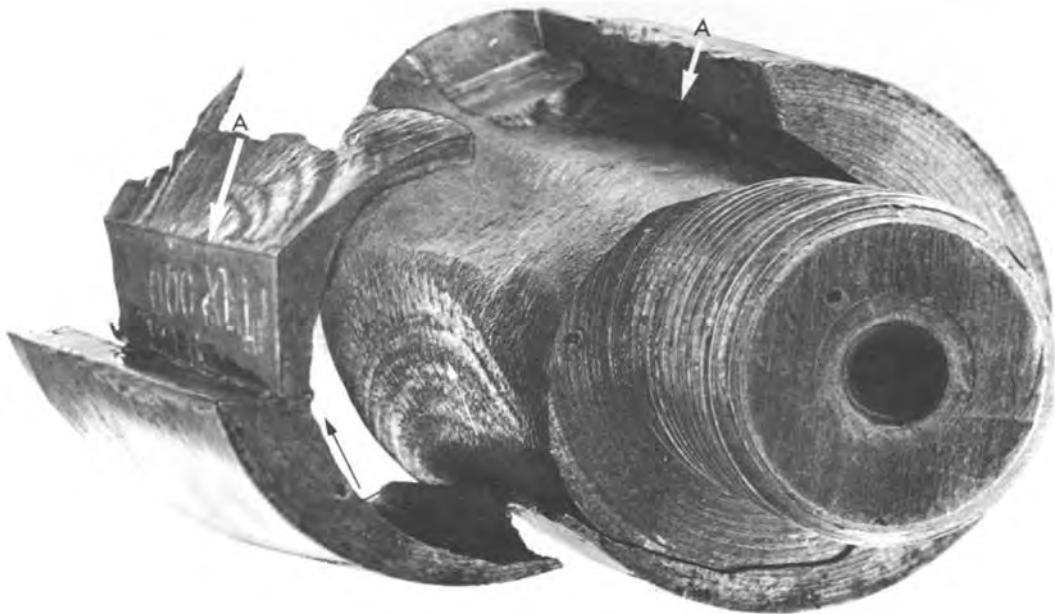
Torsional fatigue fracture in a $3\frac{3}{4}$ in. diam keyed tapered shaft of 1030 steel characterized by "peeling" that progressed around the shaft. The fatigue crack originated in the corner (A) of the keyway from pressure of the key aligning a large hub to the shaft. The fatigue crack progressed completely around the shaft, under the keyway, and started around again, all in a clockwise direction, before final separation occurred and nearly broke off the "wing" at left. The only thing necessary to prevent this type of fracture is to make sure that the large nut that forces the hub to fit tightly against the tapered surface does not come loose. If the nut is loose, the key and keyway, rather than the frictional fit of the conical joint, carry the torsional force.
